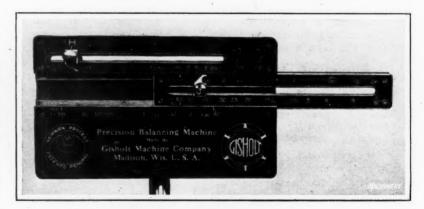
Method of using the Calculator Rule for determining the Angular Location of the Mass in the Crankshaft causing the Unbalance
